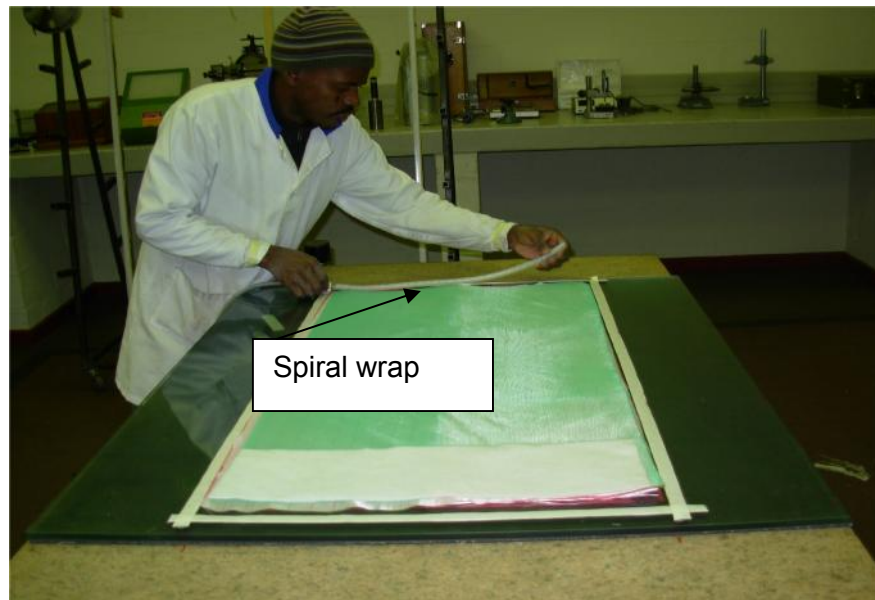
Insert spiral wrap at inlet and outlet side of the mould
